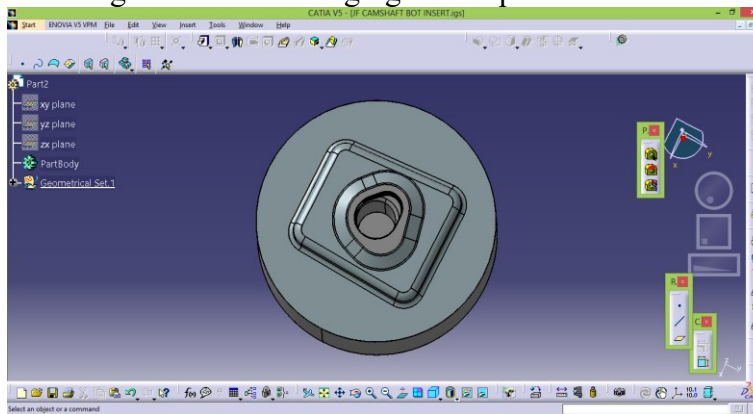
Modelling of Camshaft Forging Die Bottom Insert in CATIA V5 Software.
